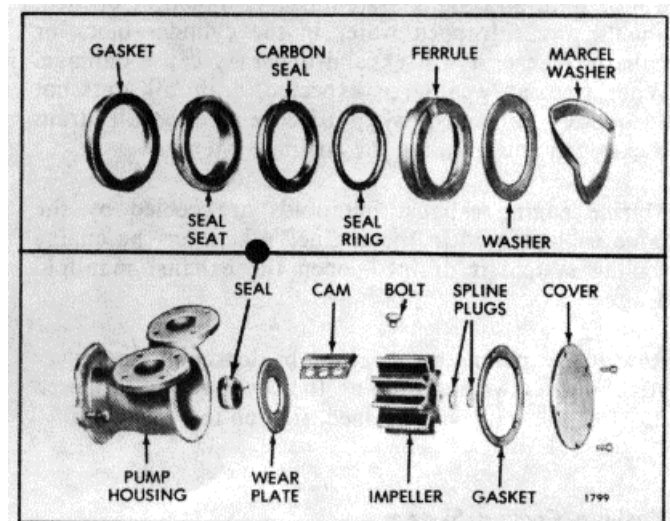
Raw Water Pump Details and Relative Location of Parts
